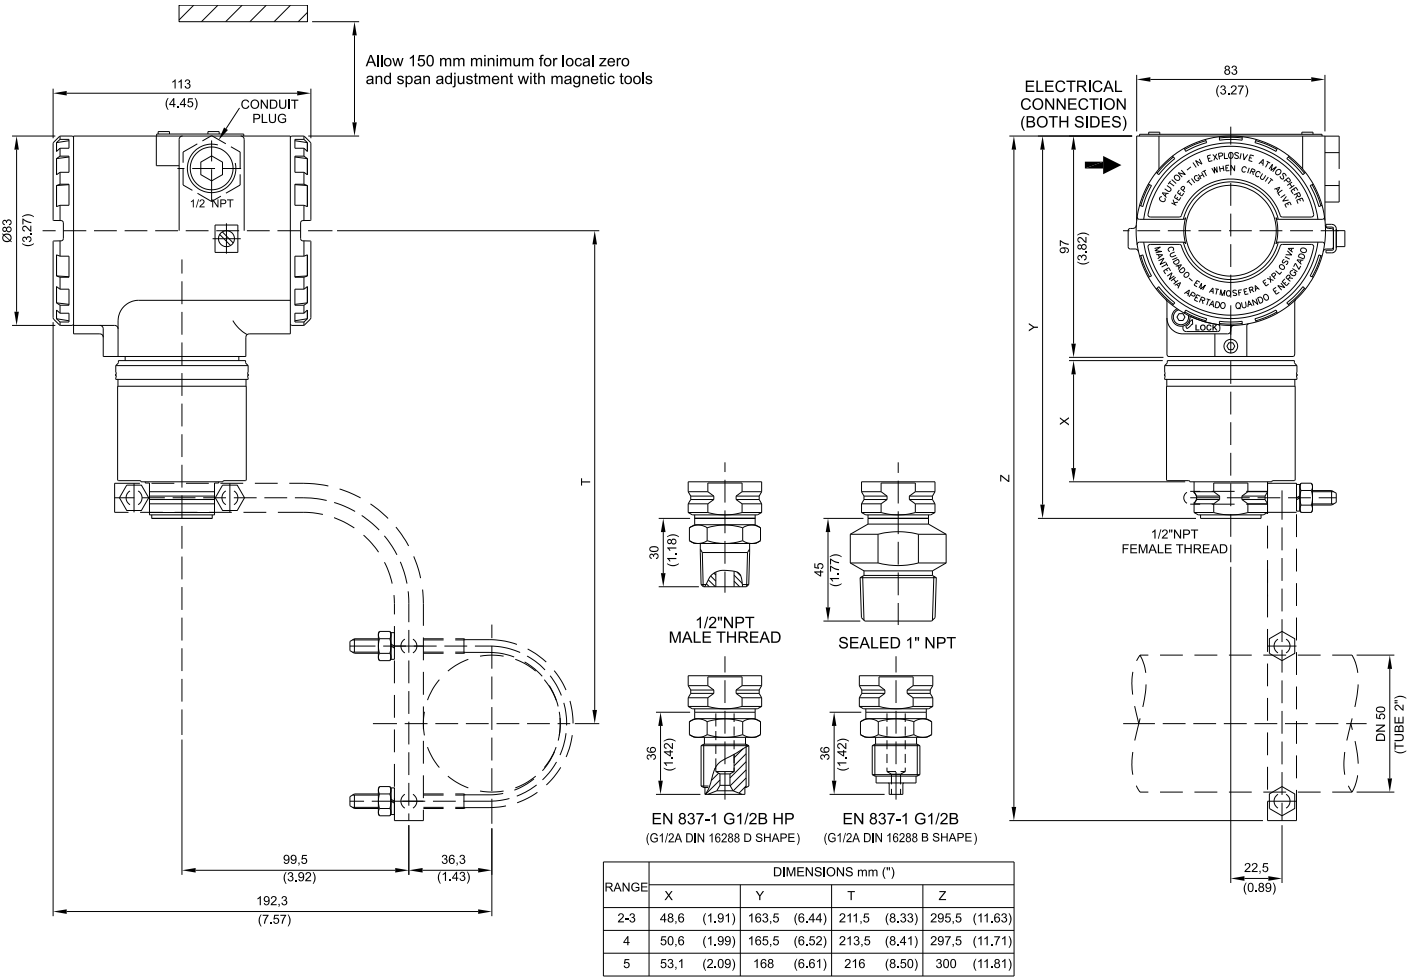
(a) – Dimensional Drawing and Mounting Position for LD290
